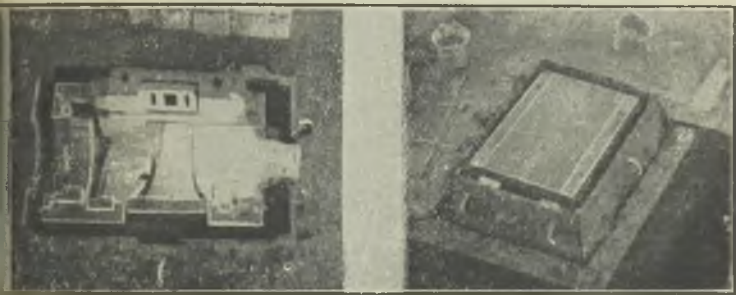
PLAN VIEW OF ASSEMBLED CORE.
